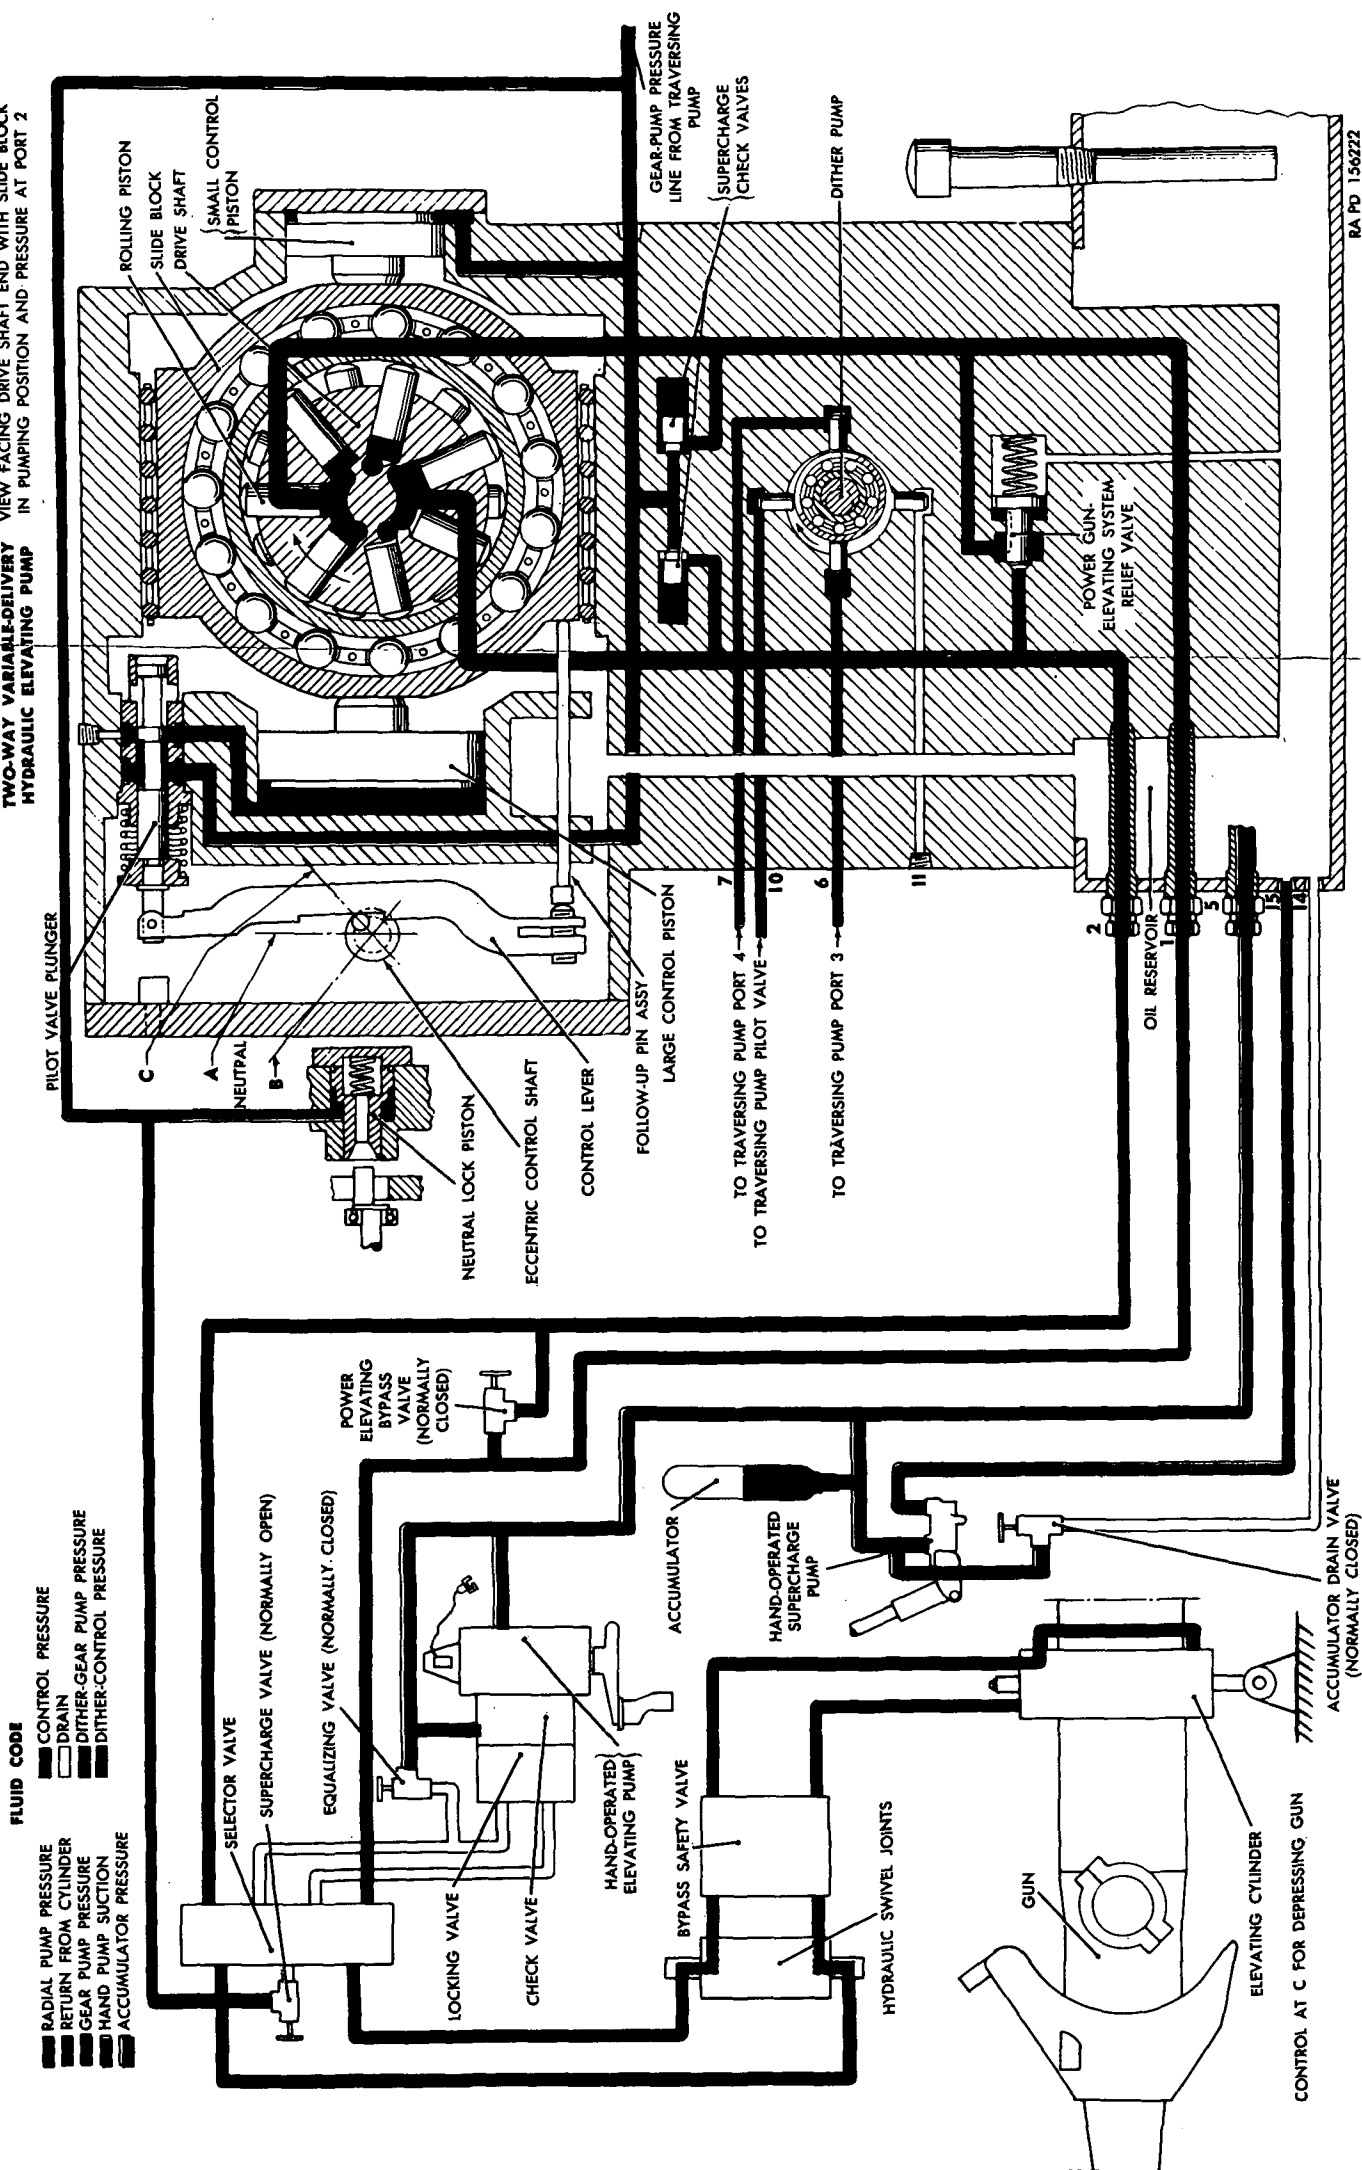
Hydraulic gun-elevating system oil circuit (depressing).
